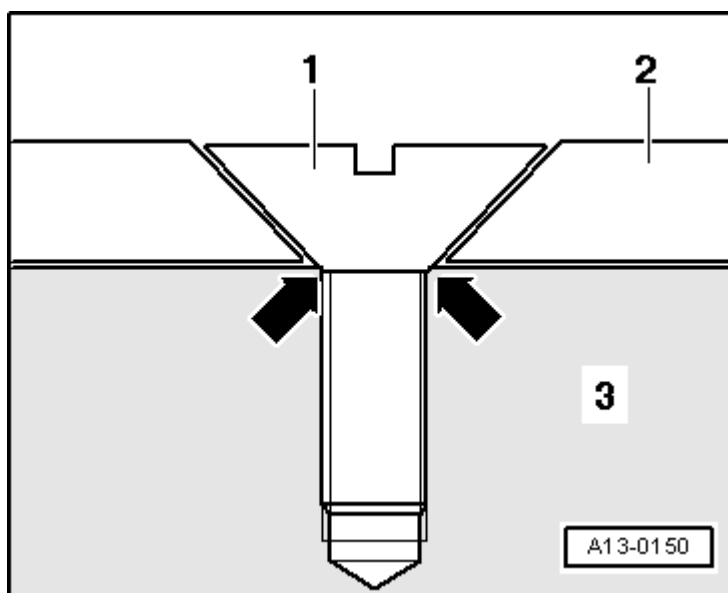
Identifying Attachment Points, Countersunk Screws, Crankshaft & Sensor Wheel
